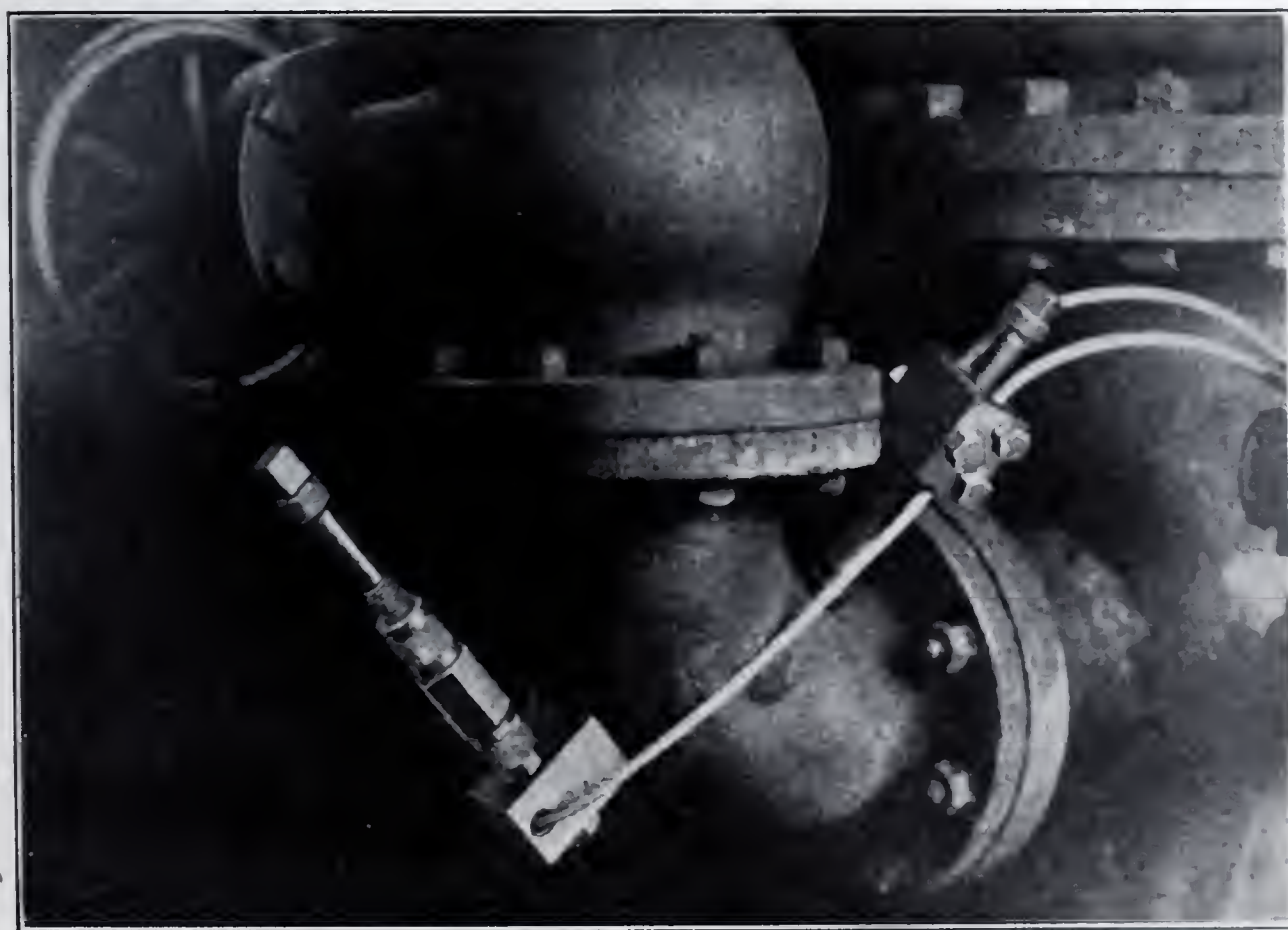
Set-Up for Blow-Hole or Cracked Casting.
